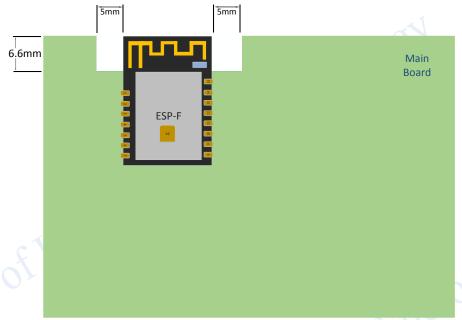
Scheme 2: Antenna is placed along with side of the board, and it is blank at the bottom of the board.
